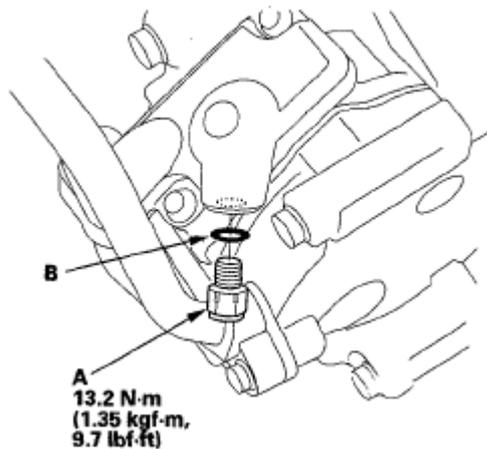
Identifying Relief Valve And O-Ring With Torque Specifications
